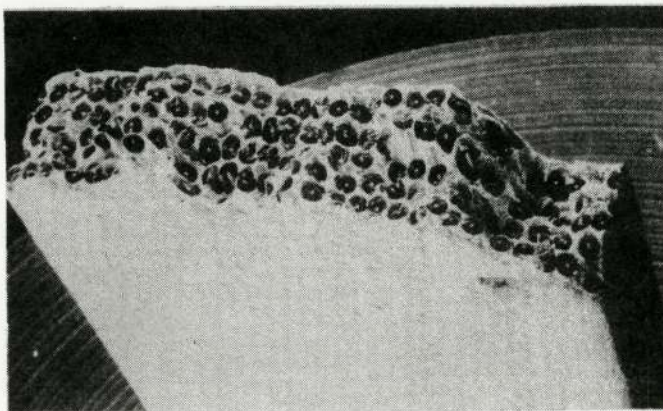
Details of a canted fracture surface in bilayer B-Al composite, 3.9 mil filament diameter.
